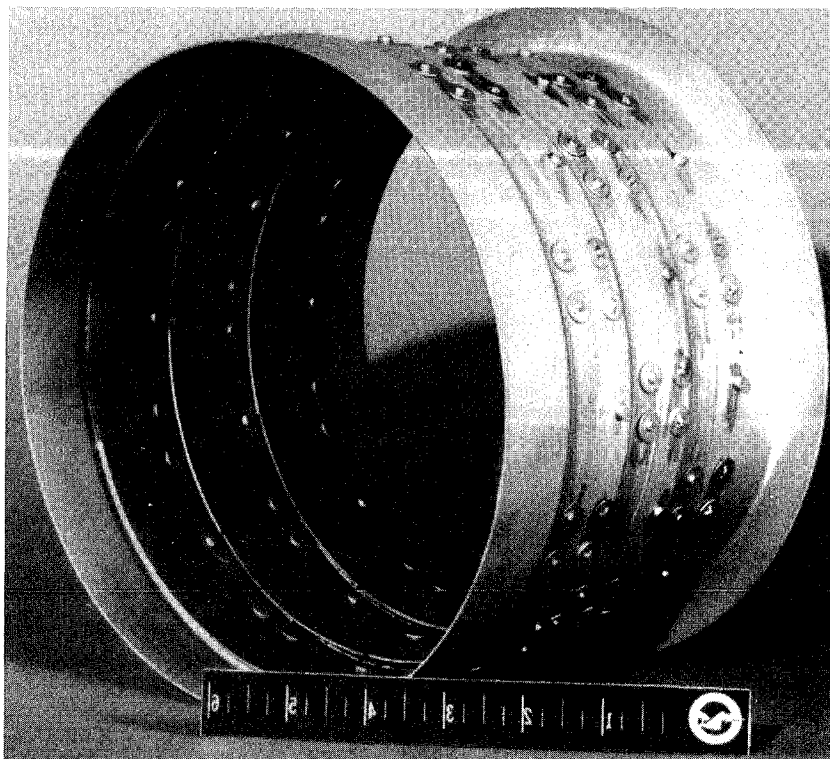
Hastelloy X Riveted Louver Thermal Fatigue Test Specimen
